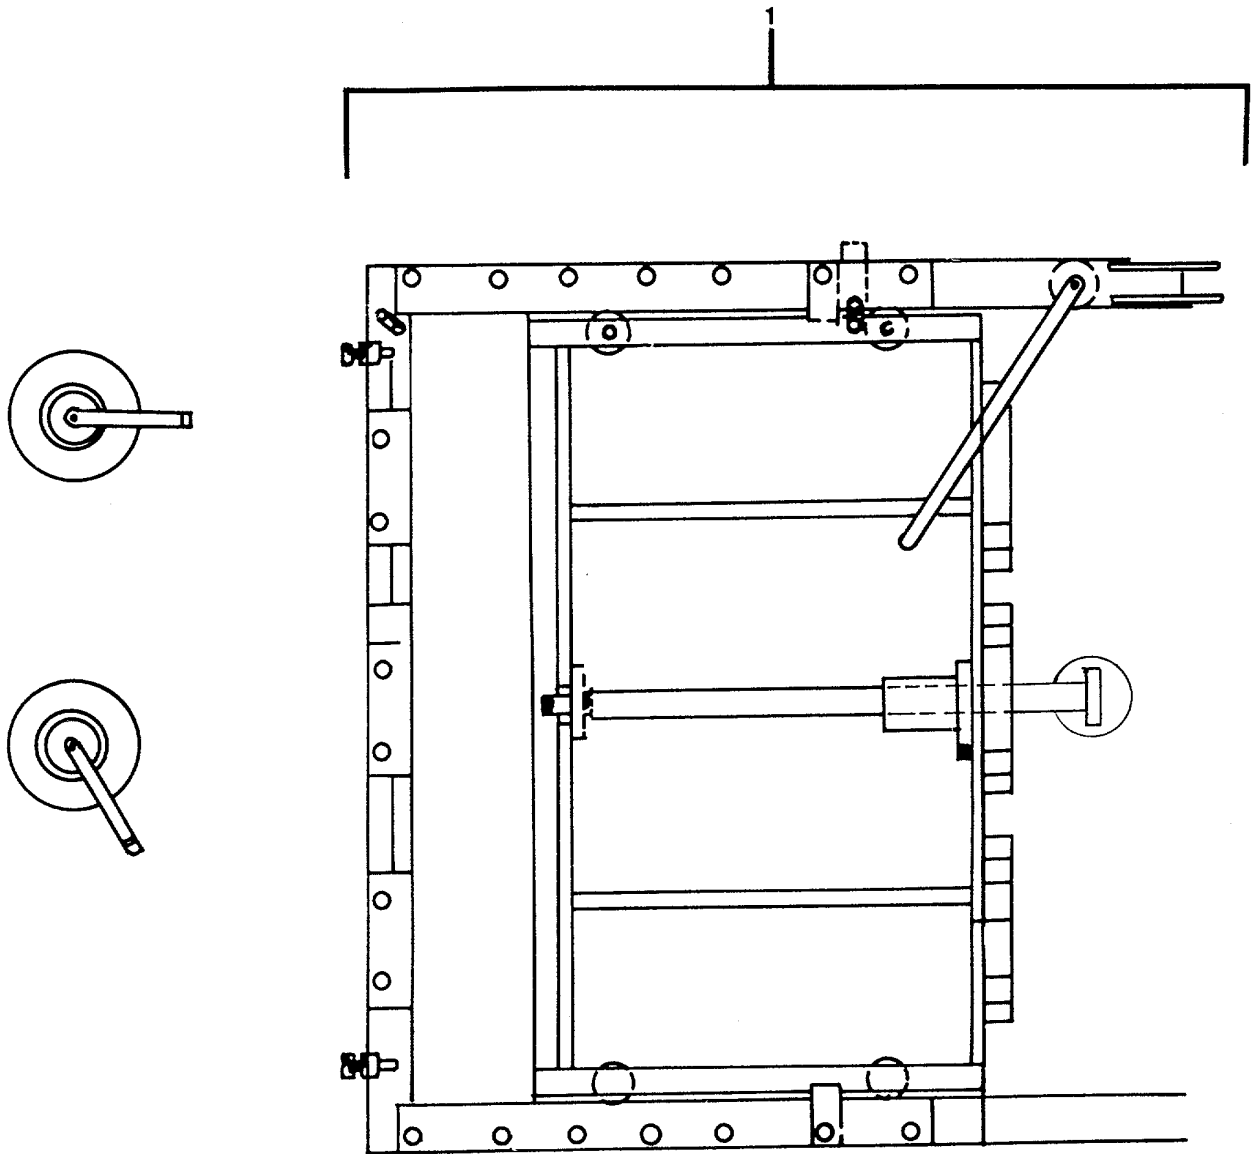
A DOOR, HYDRAULIC DOOR D-WK-492-A43
